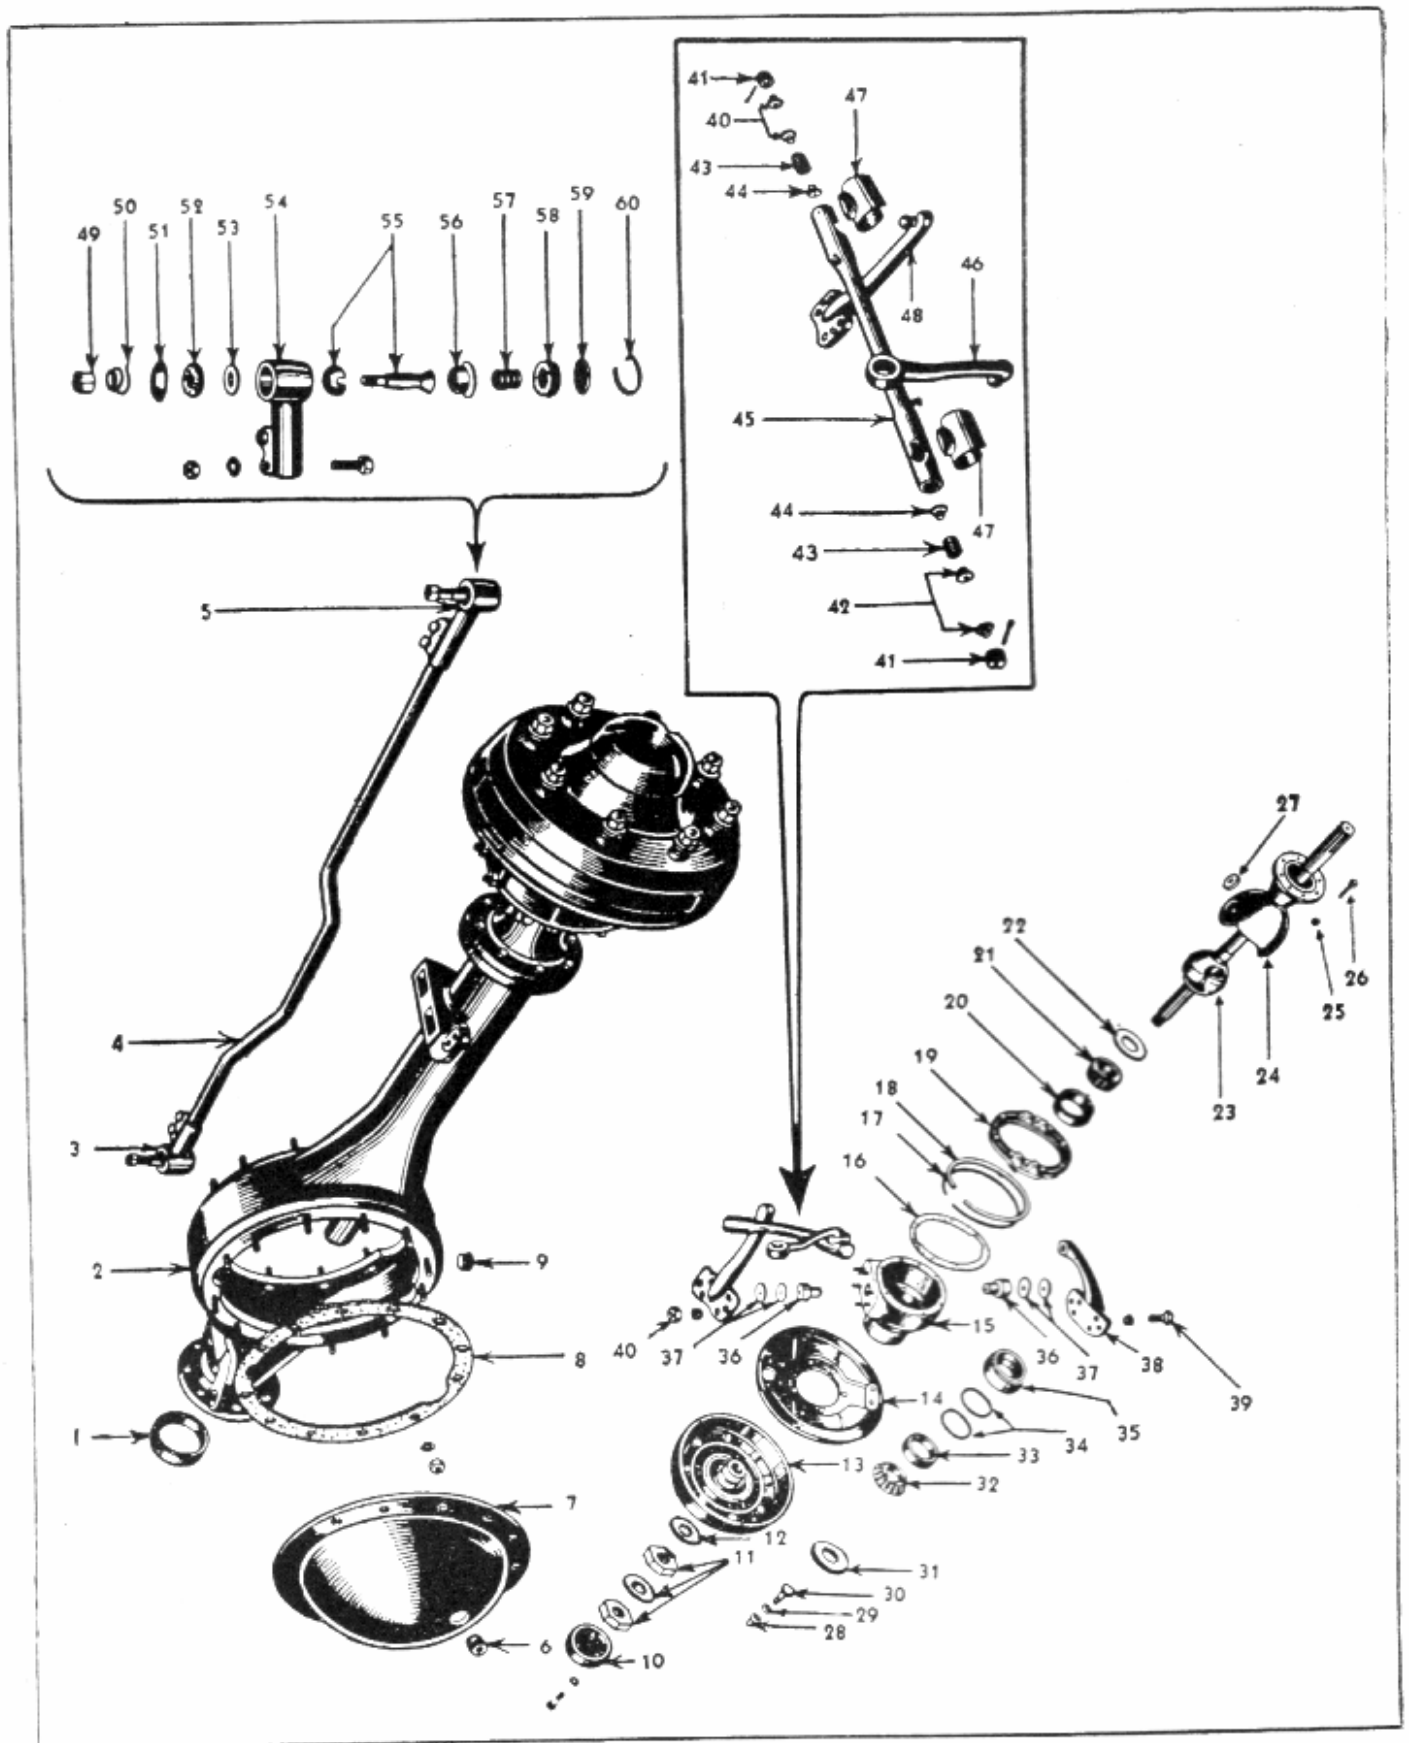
Exploded View of the Front Axle Assembly, 6" Joint.
